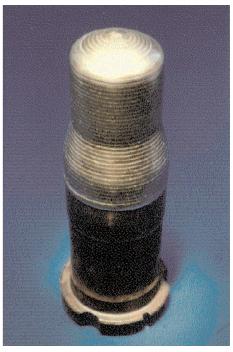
Hot forming tool for forging car axle parts, tear area is coated with Stellit 21
